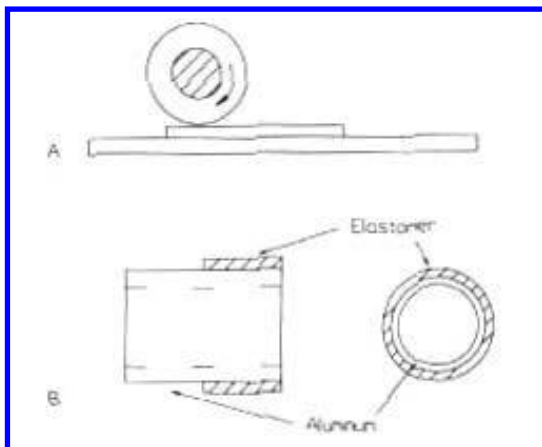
The configuration of the check separator mechanism is shown in "A". "B" shows design details of the roller. Nominal dimensions of the roller are hub-length, 1 in.; diameter, 1 in.; wall thickness, 0.03 in.; elastomer length, 0.5 in.; thickness, 0.03 in.
